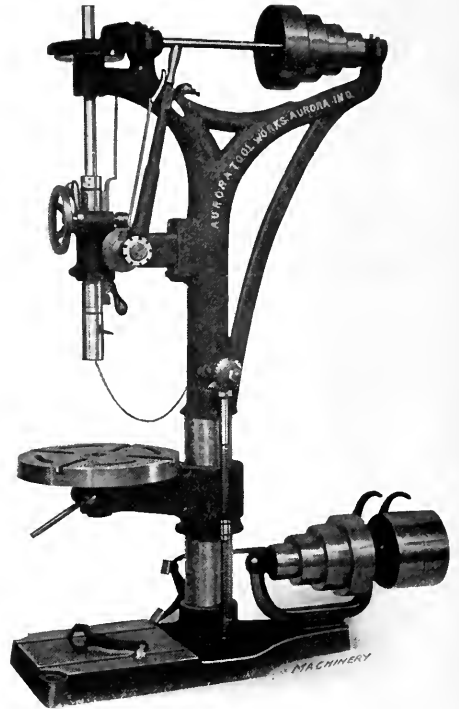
Aurora 20-inch Drill equipped with Wheel and Lever Feed
